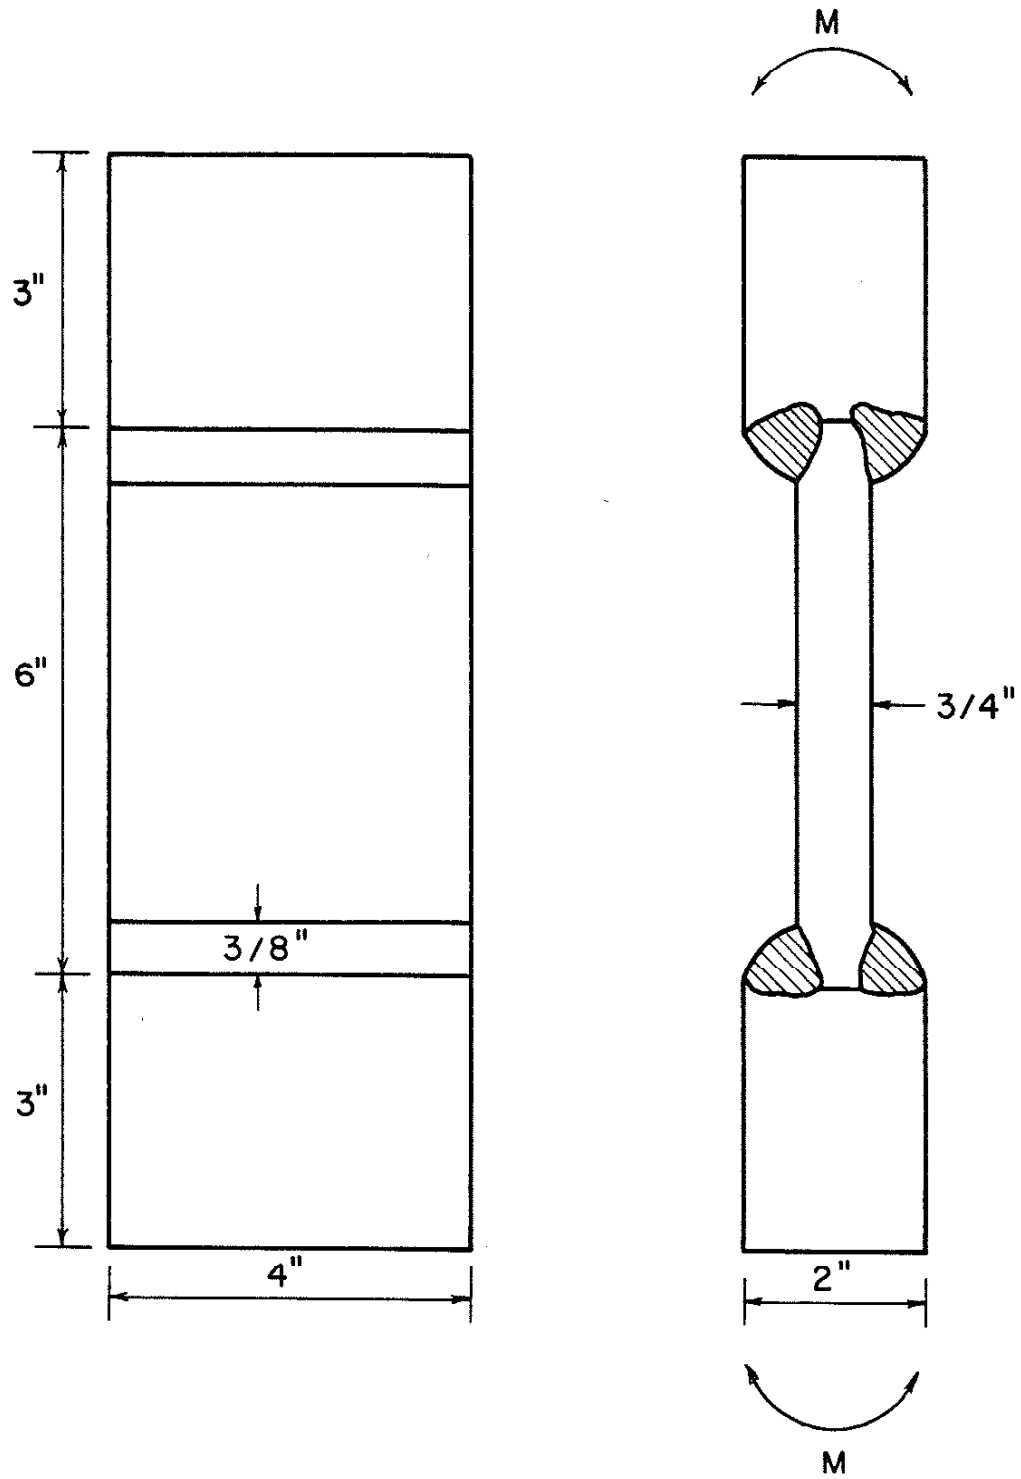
Specimen Geometry of Fillet Welds. Specimen Was Loaded in Reverse Pure Bending
